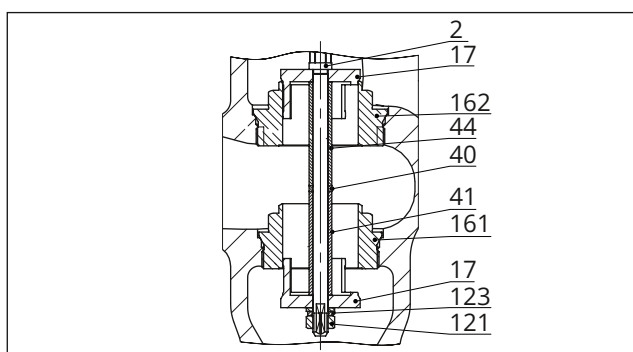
Valve in DN 32 and 50/NPS 3 and 4 · Diverting valve
